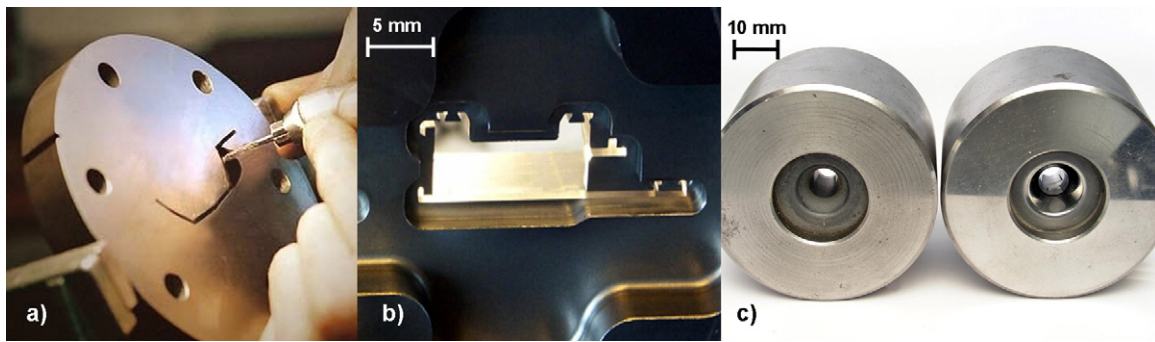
(a) Polishing by hand of an extrusion moulding die. (b) A cavity of an extrusion moulding die finished by AFM. (c) A tool for the deformation of wires before and after AFM.
